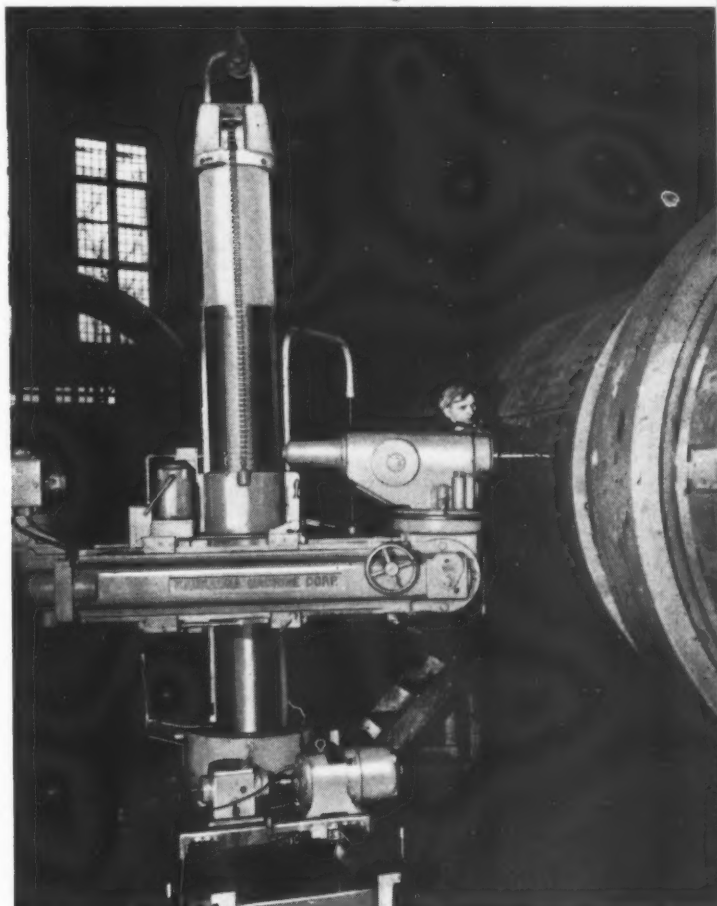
Using a portable drilling and tapping machine for producing eighty holes around a large drying kiln
